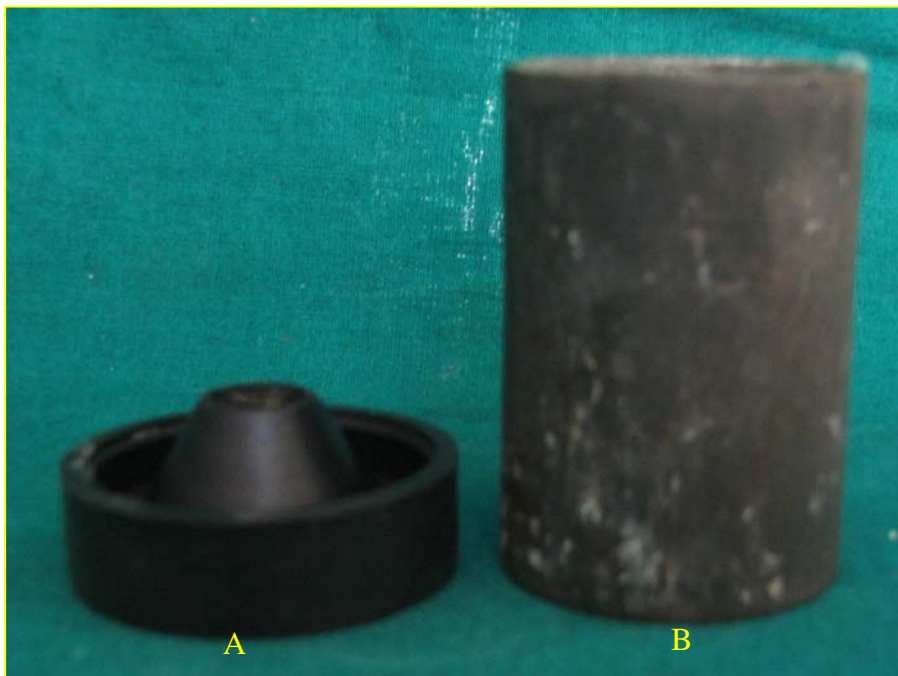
Crucible former (A) and Alloy casting ring (B)
